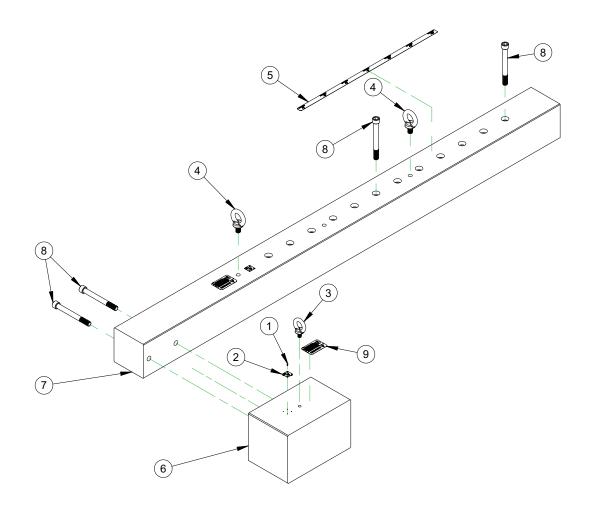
BACKFACE ASSEMBLY (P/N 69711)
